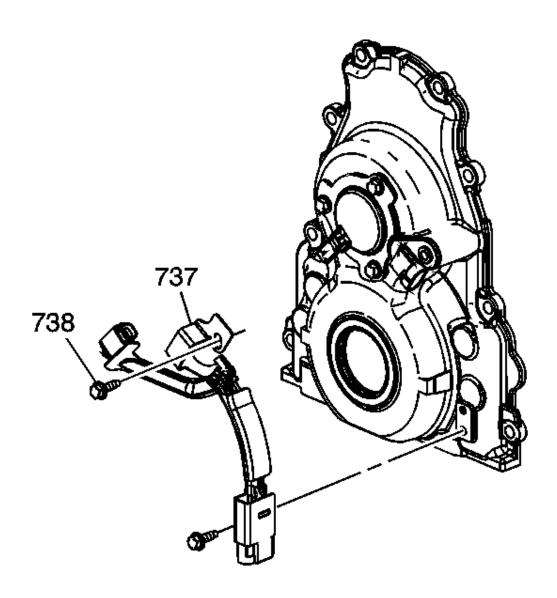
View Of CMP Sensor Wire Harness & Bolts Courtesy of GENERAL MOTORS CORP.
